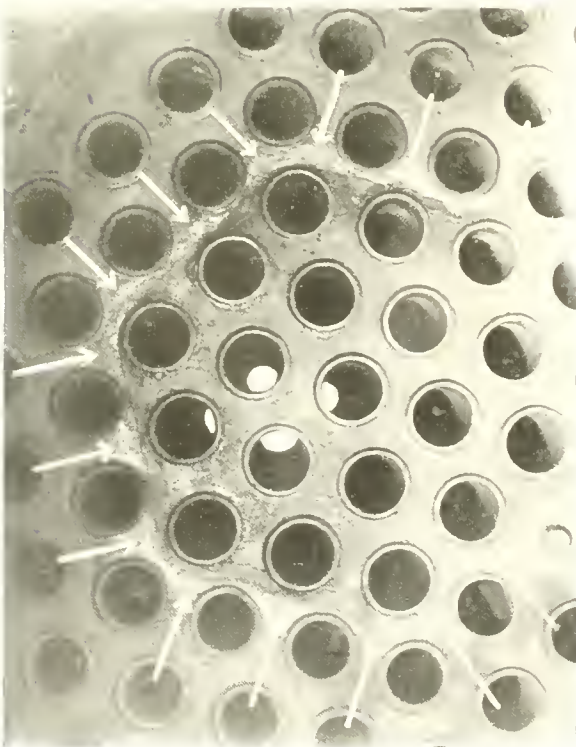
Finished arc welded "diamond patch" on bottom flue sheet of vertical boiler. Notice the neatness of the finished job.
